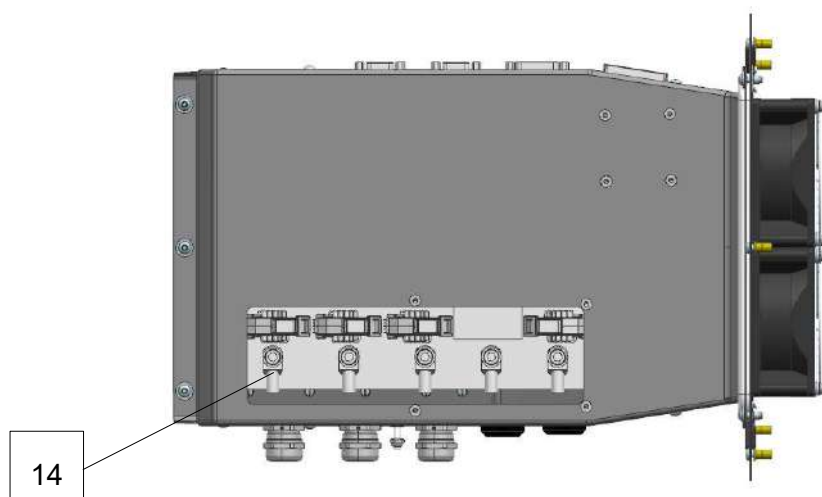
Air-cooled motor controller assembly detailed overview
